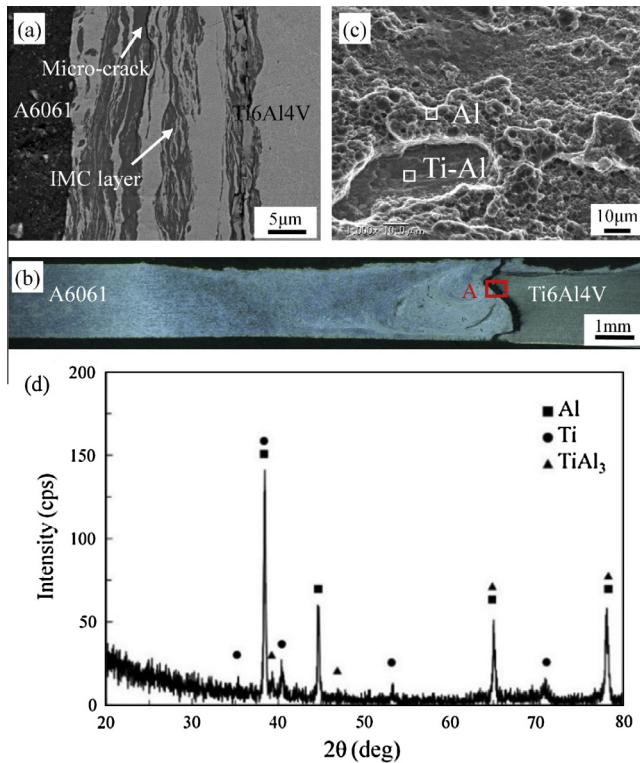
Interface (a), fracture location (b), fractured surface (c), and XRD of the fracture surface of Ti side (d) of the joint with 1000 rpm – 120 mm/min – 1.2 mm.
